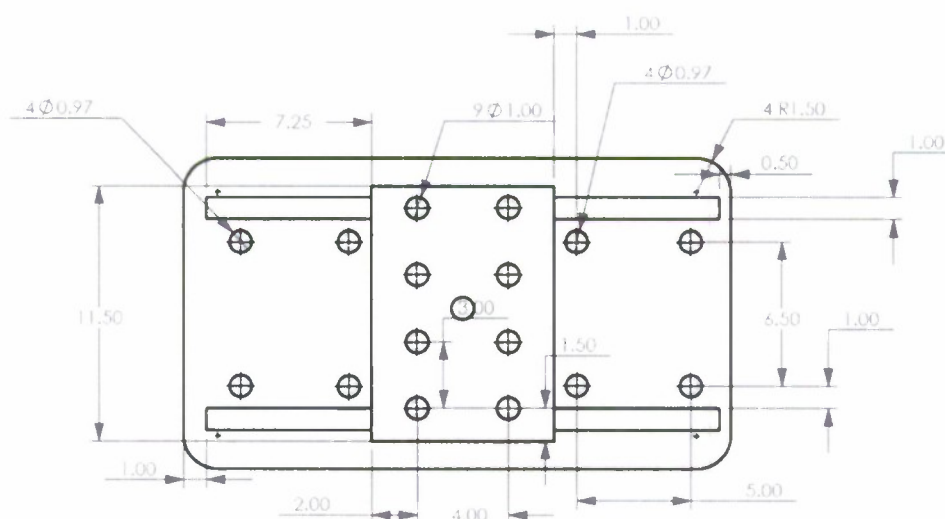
SOLIDWORKS™ Rendering of End Bearing Bolthole Pattern
